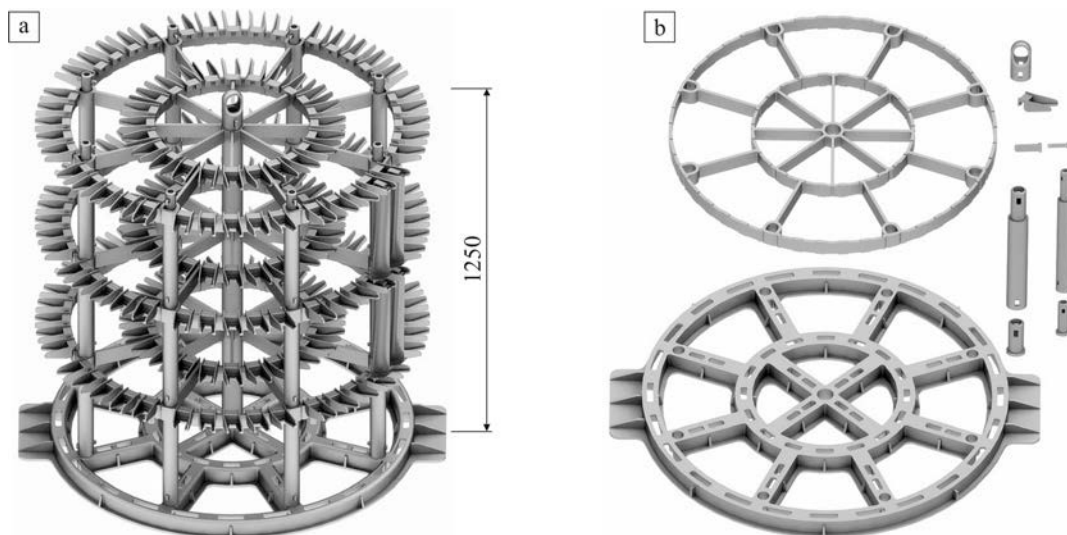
The equipment for the heat treatment of turbojet engine rotor blades [3, 9]: a) general view, b) single components
